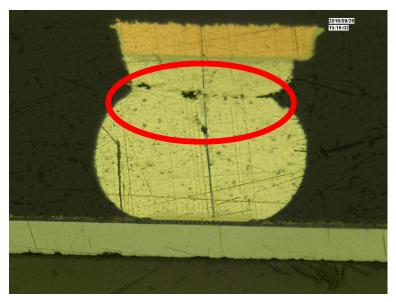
Lost contact due to a head-in-pillow (snowman) defect during soldering (cross section of the solder ball)
